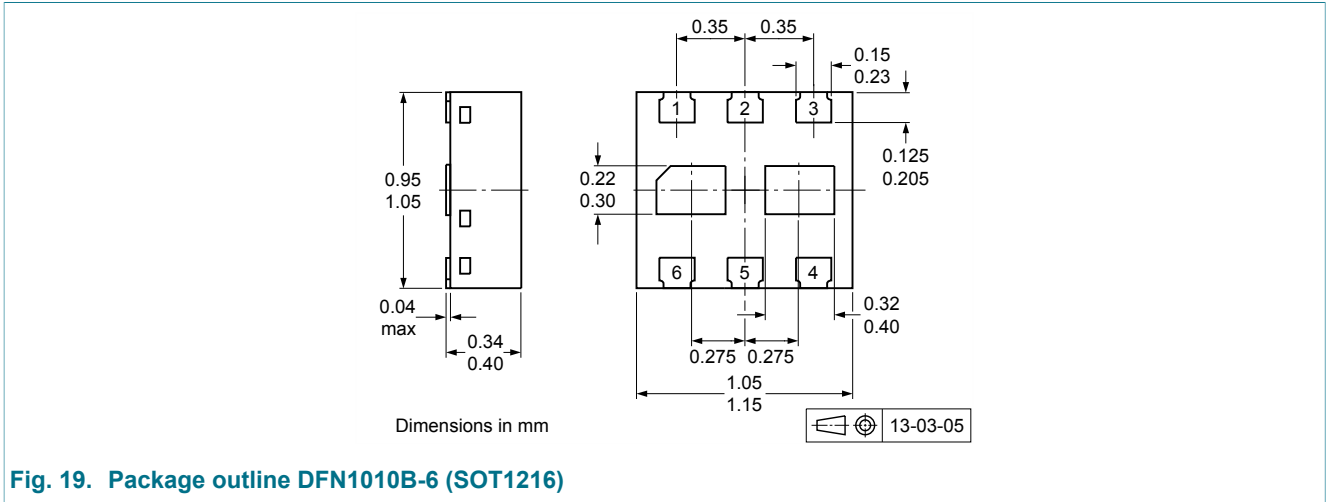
Package outline DFN1010B-6 (SOT1216)
